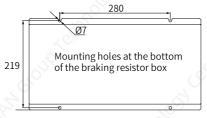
Locations and dimensions of mounting holes at the bottom of the braking resistor box (Unit: mm)
